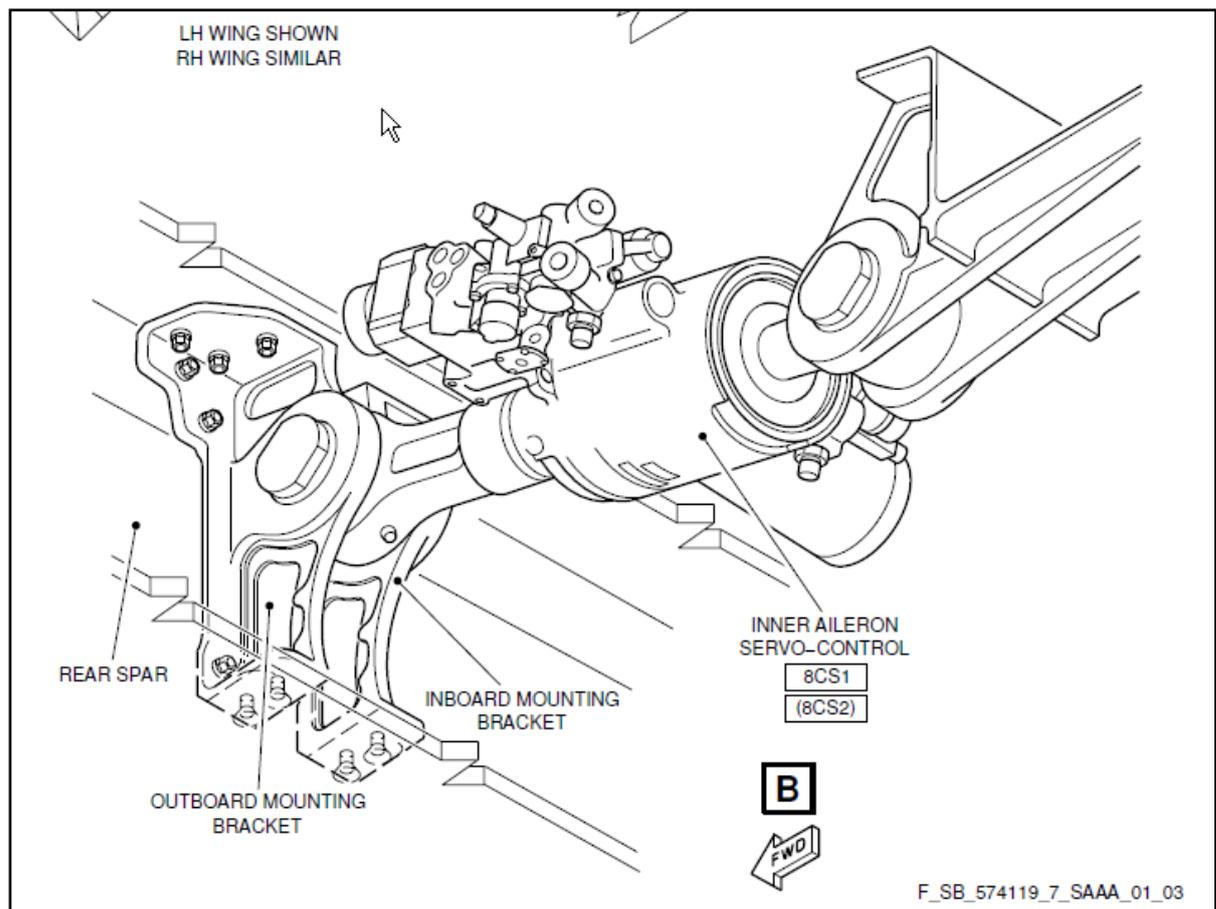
Engineering schematic of the assembly (LH Wing)
